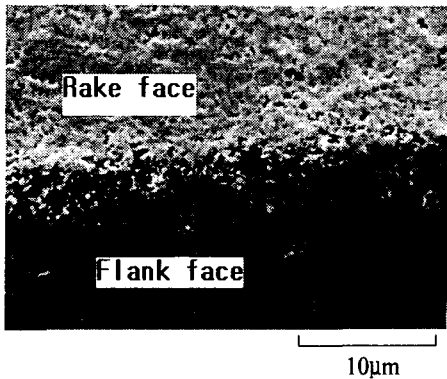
SEM photographs of the worn cutting edge of K01 tool in dry machining of the ceramic presintered at 1100°C
